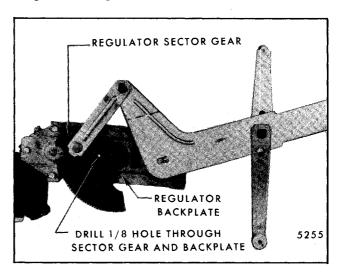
Tailgate Window Regulator Motor Removal
